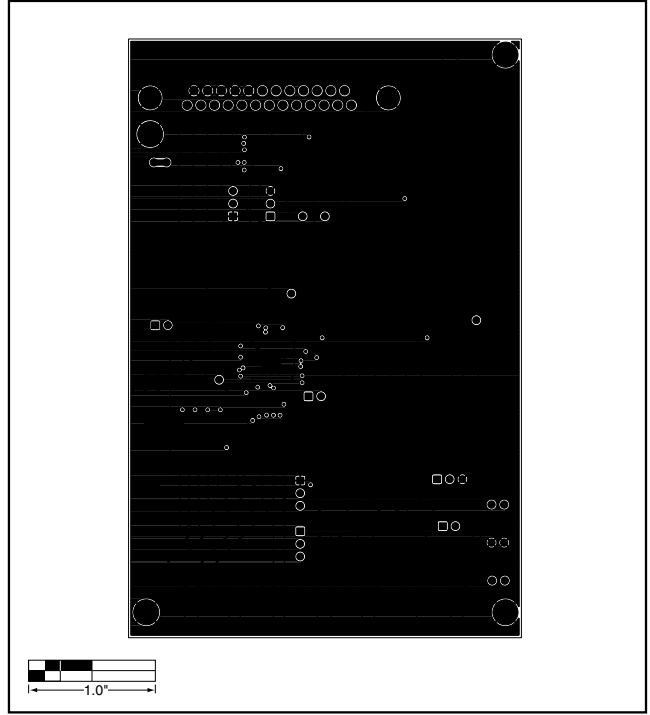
MAX2745 EV Kit PC Board Layout—Layer 2
